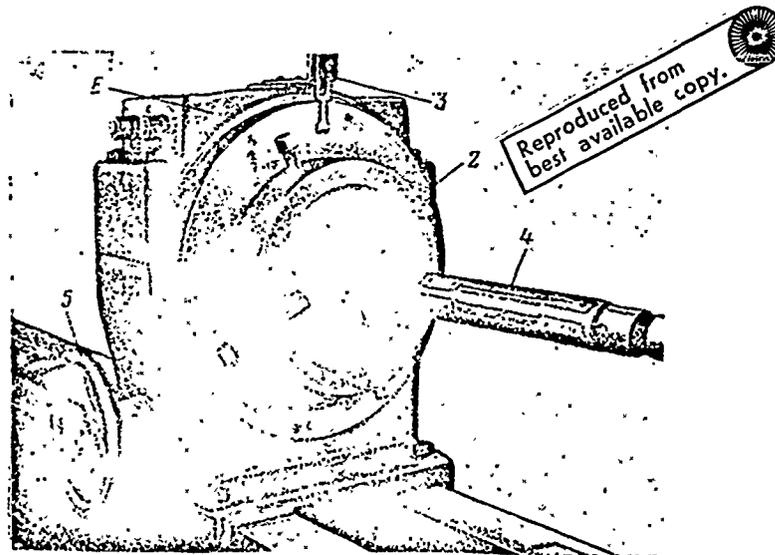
Lunette E with spacing mechanism of the rifling machine shown in Fig. 123
